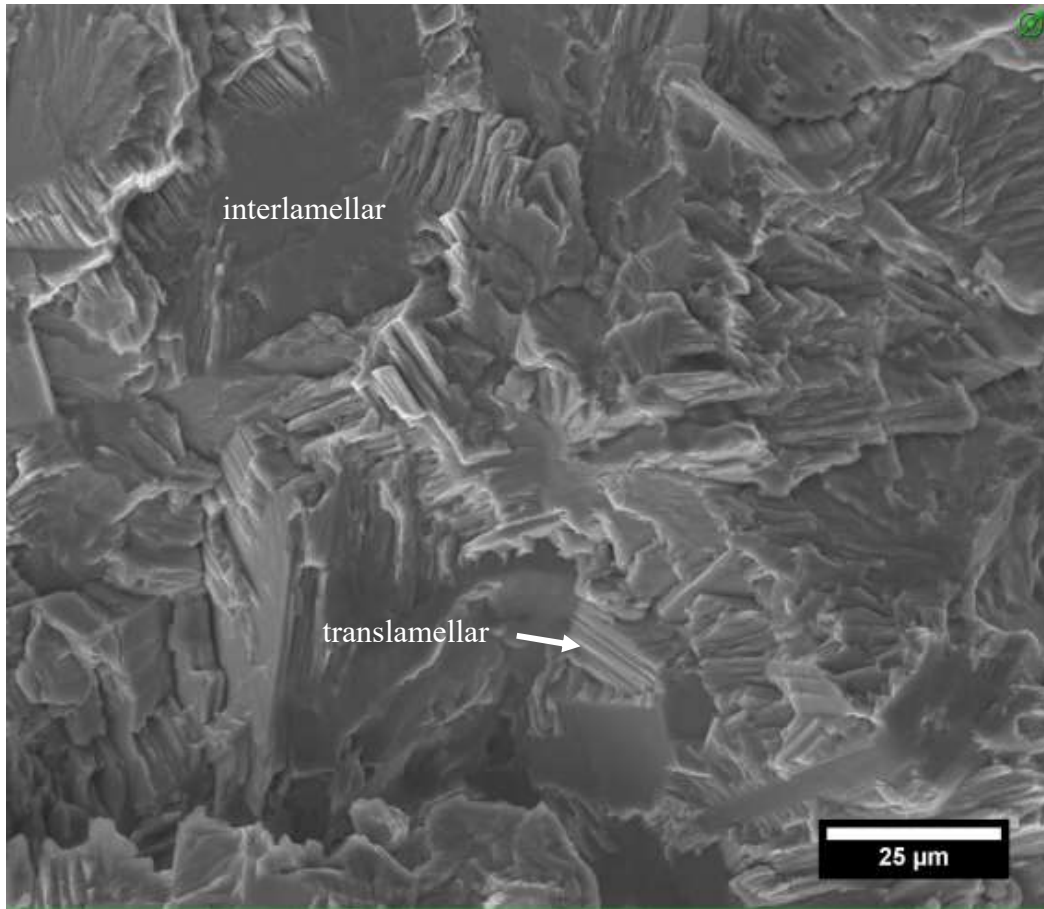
Representative fatigue crack SEM-SE fractography of as-cast (T-L) fatigue fracture features in the low  $\Delta K$  regime at  $R = 0.3$ . Crack direction is from top to bottom.
